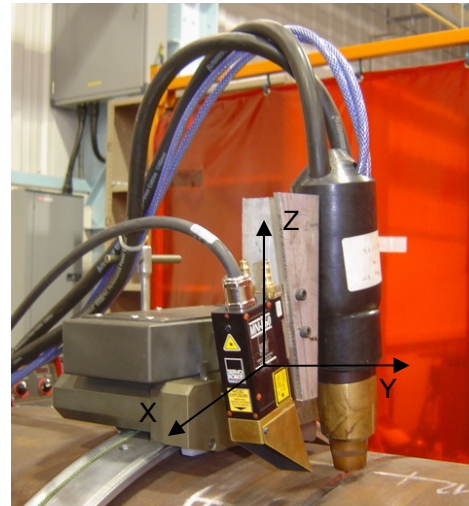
Welding head with tandem torch and laser sensor.
